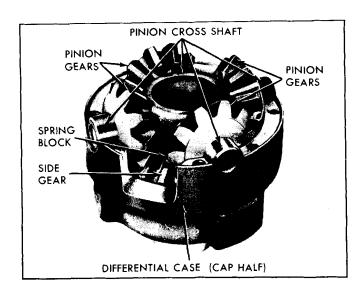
B-13 Installing Parts in Cap Half - Four Pinion
